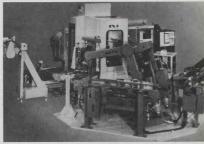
A manufacturing "cell" consists of a group of flexible machines linked with robotics. (Kearney-Trecker)
